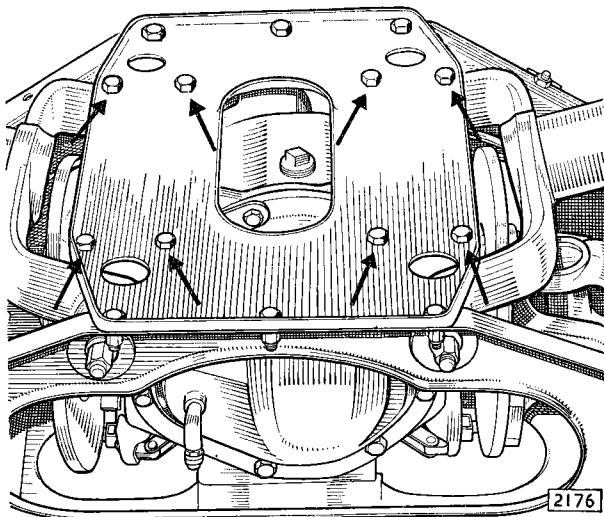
Showing the eight bolts which secure the tie plate to the inner fulcrum mounting bracket
